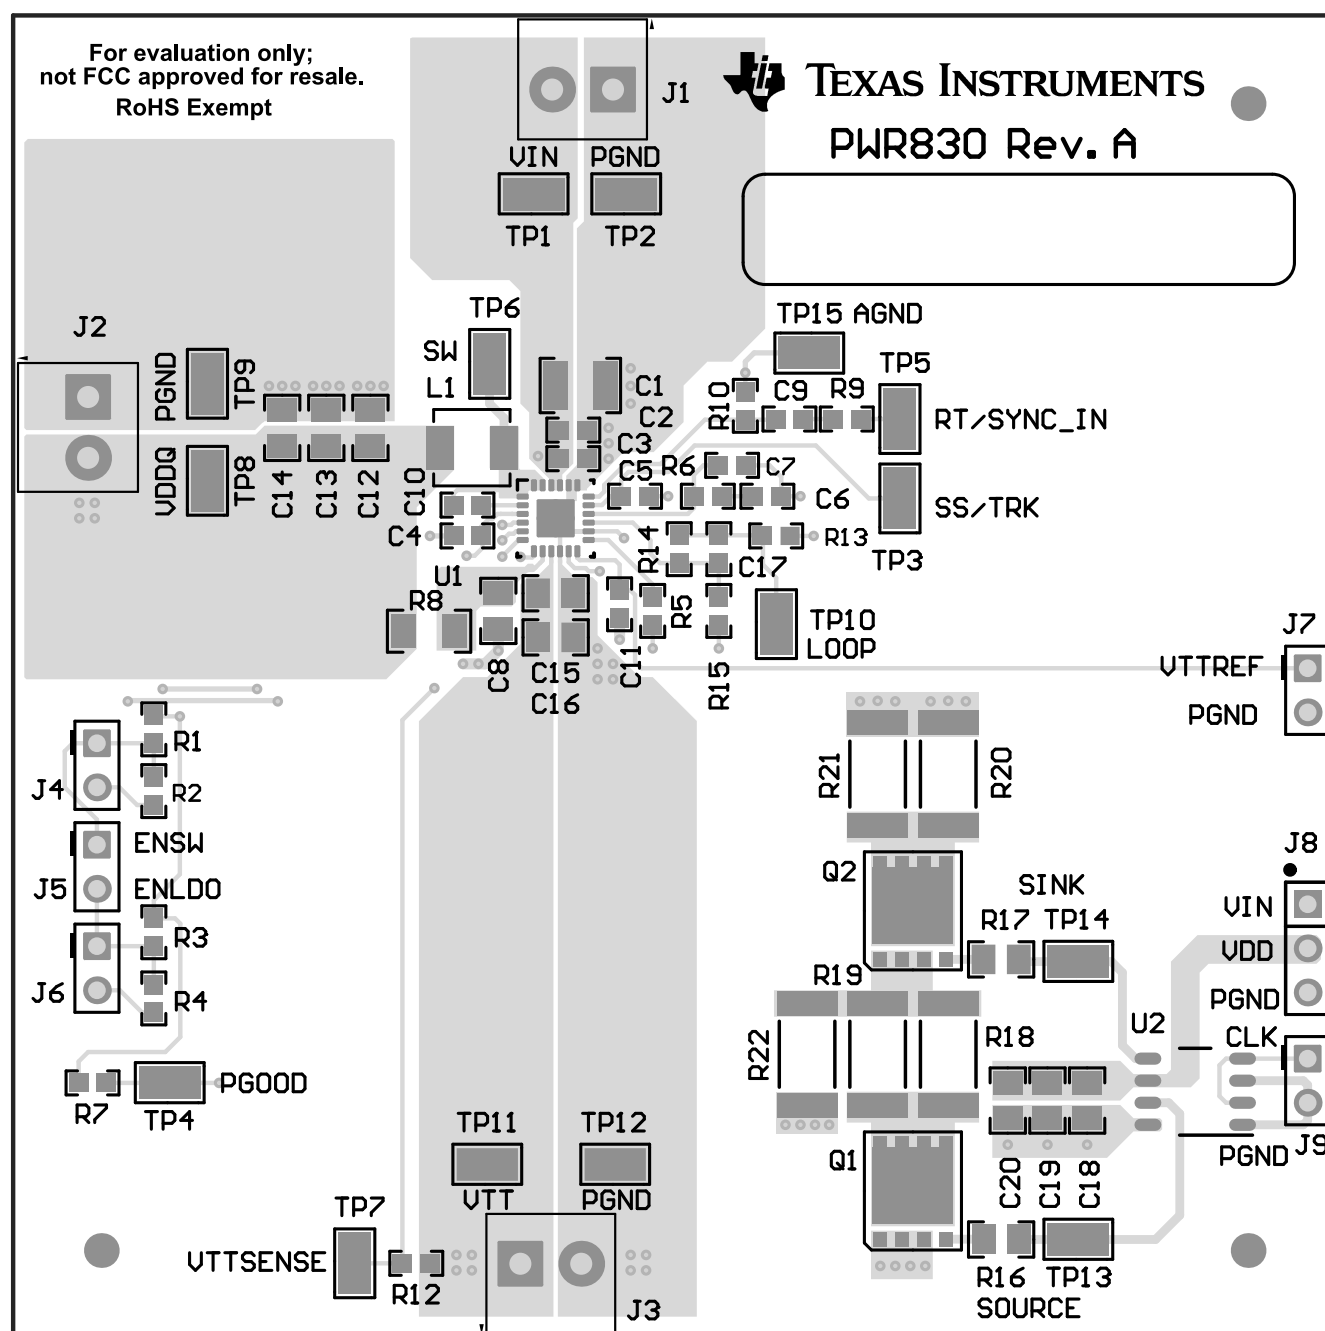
TPS54116-Q1EVM-830 Top-Side Assembly
